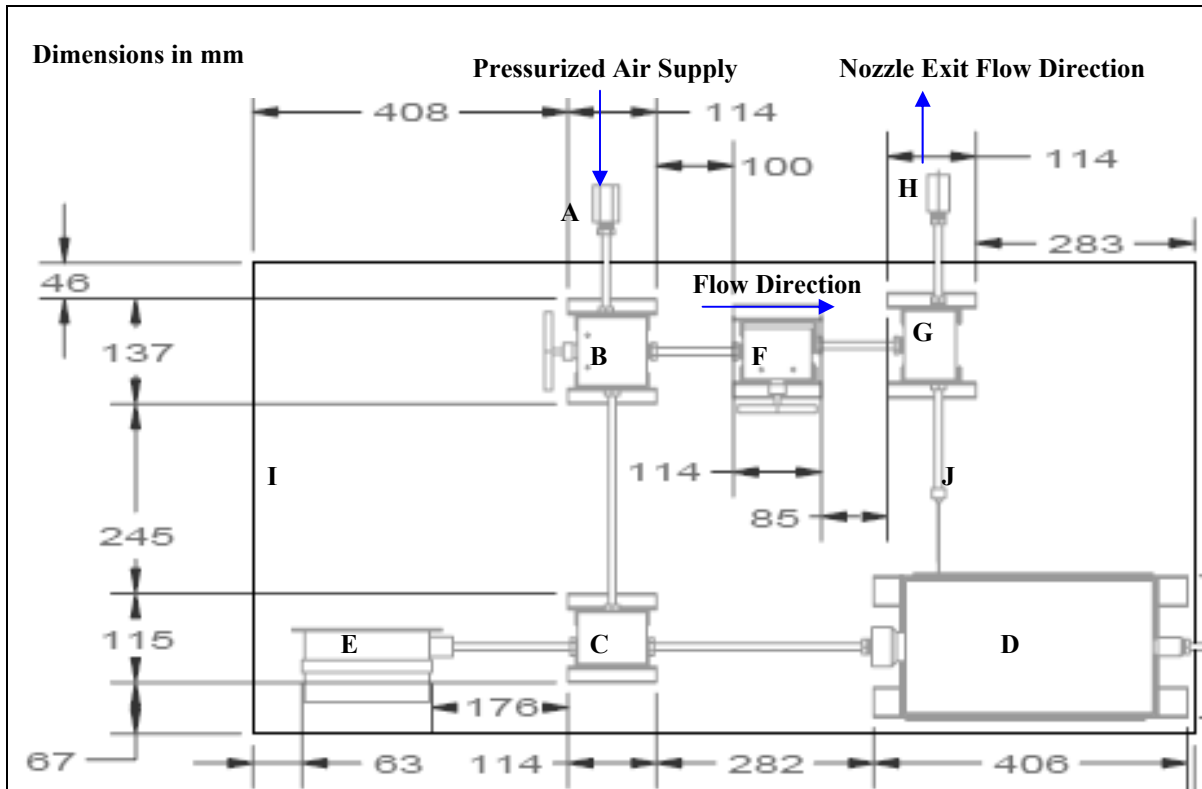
CAD Figure of the Pressurized Gas Generation Assembly Top View Showing Gas Flow Directions (Scale 1:10).
